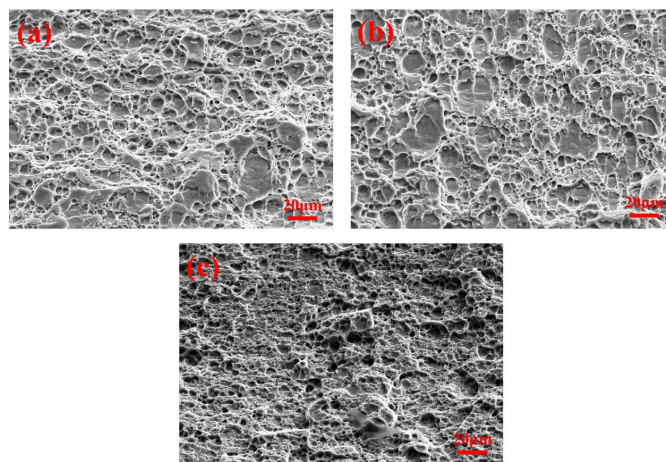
Morphologies of fracture surface of tensile specimen after different welding modes: (a) CMT; (b) TIG; (c) FSW
